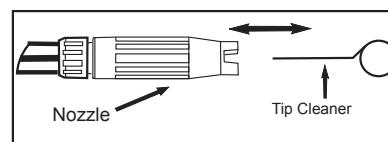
Insert tip cleaner in nozzle hole and move back and forth until debris is dislodged
